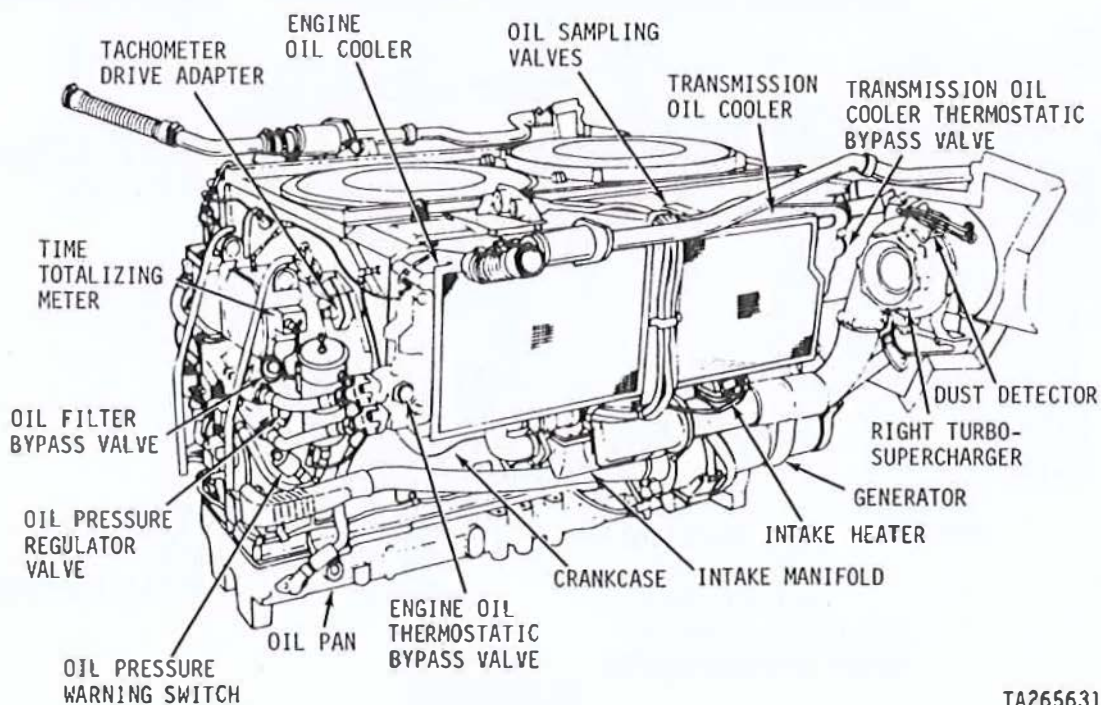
AVDS-1790-2CA engine assembly - left front view.
